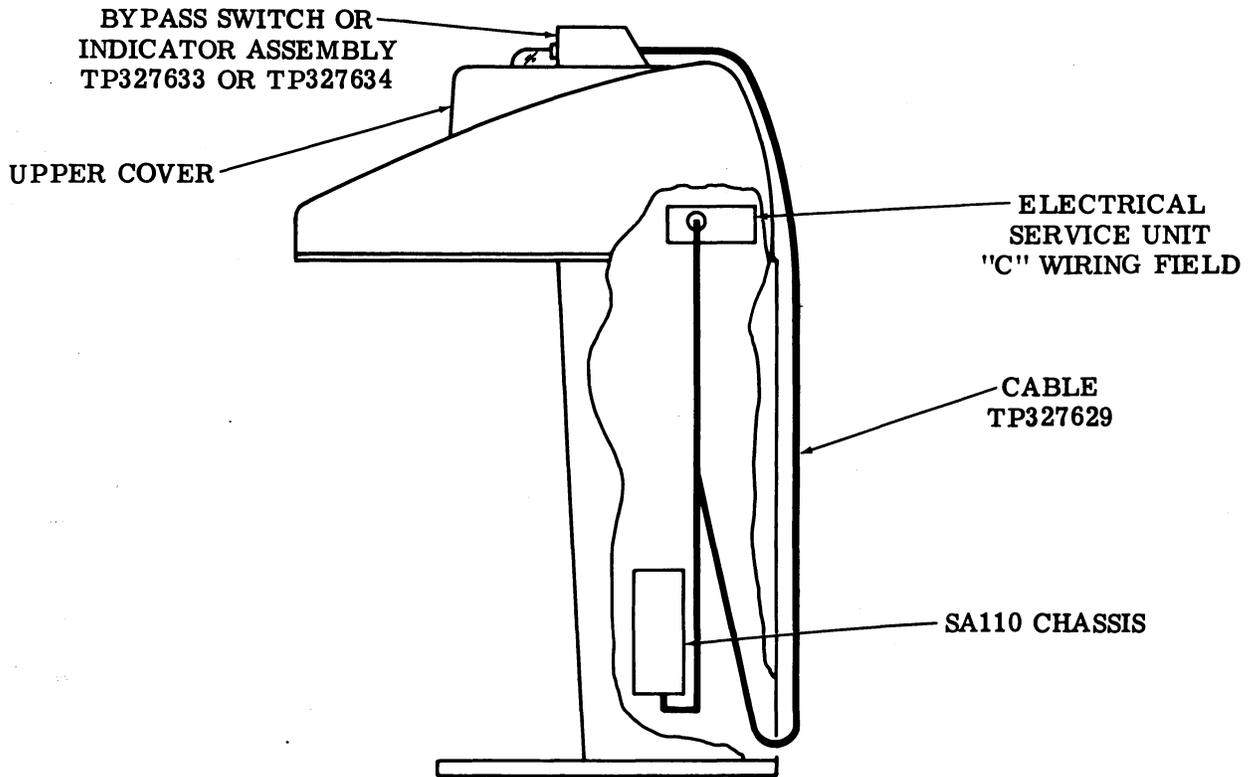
Location of SA110 Chassis and Bypass Switch or Indicator Assembly on 35 Type Set
